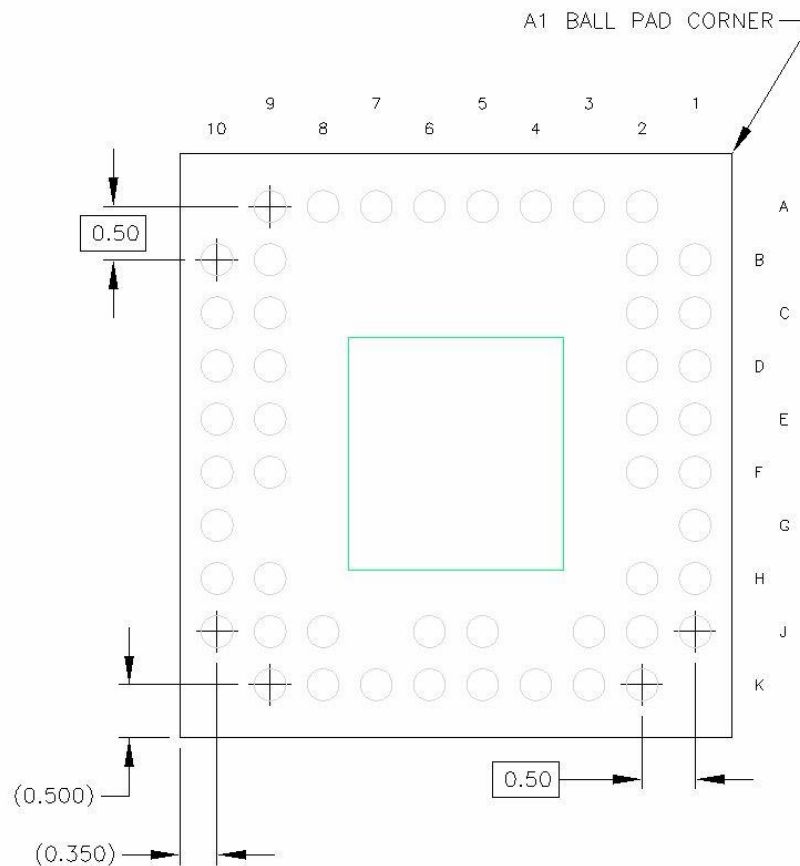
Physical layout of the A111 sensor, bottom view.
